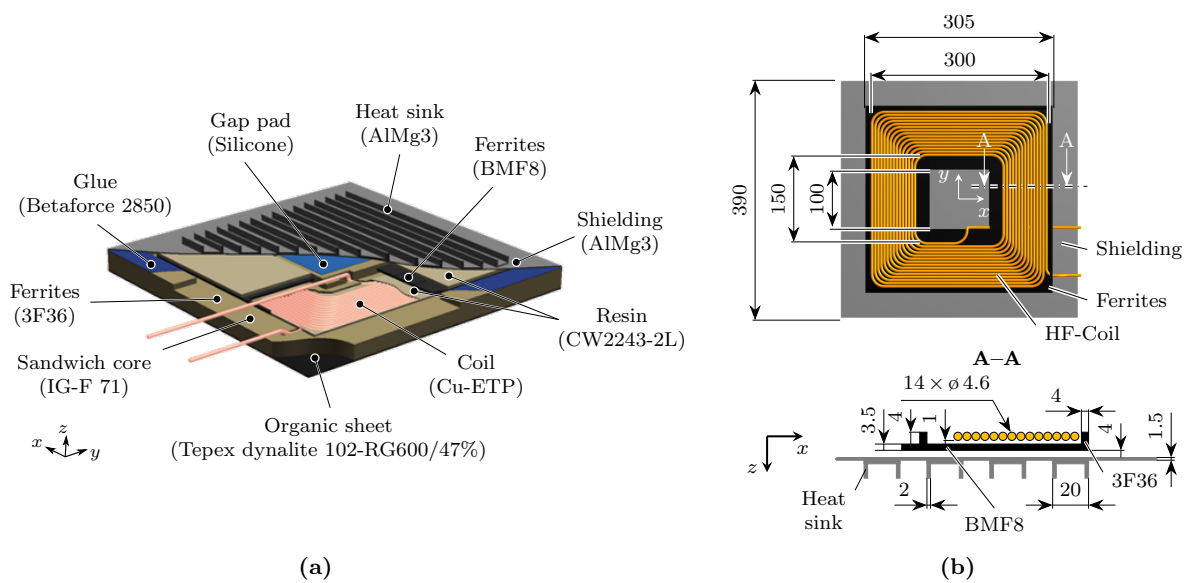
Proposed CPM design: (a) sandwich design and (b) dimensions (in mm) of the magnetic active components.
